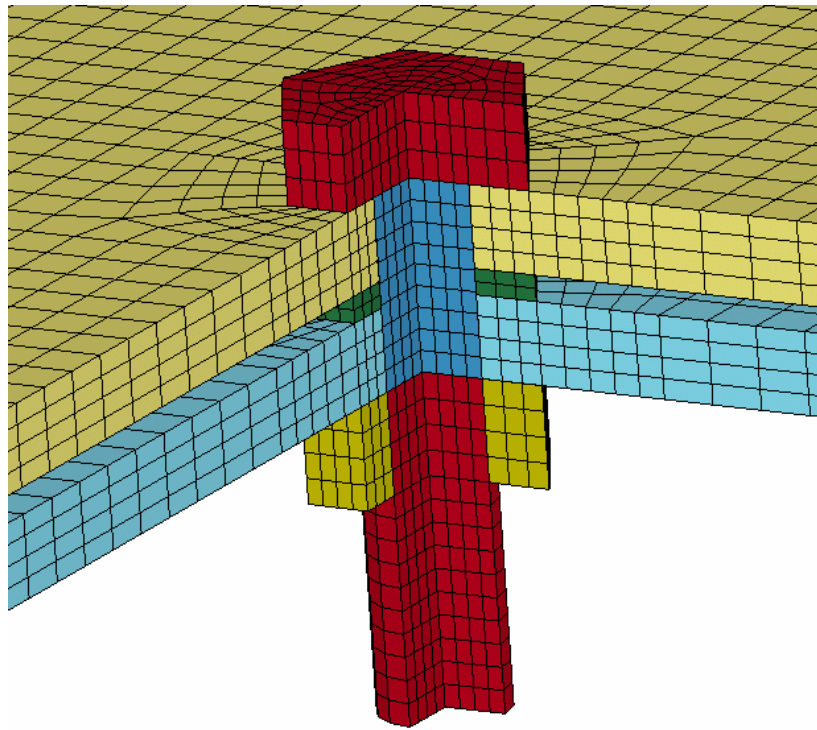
Detailed view of bolt assembly in the hat-plate structure
